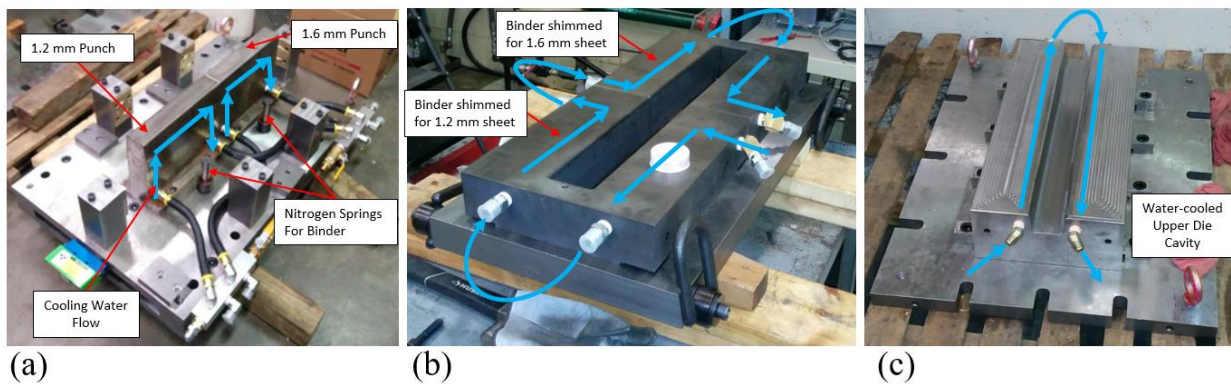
Fully cooled multi-gauge forming tool with blue lines showing flow of chilled water within the die: (a) Cooled punches, (b) Cooled segmented binder, (c) Cooled die cavity
